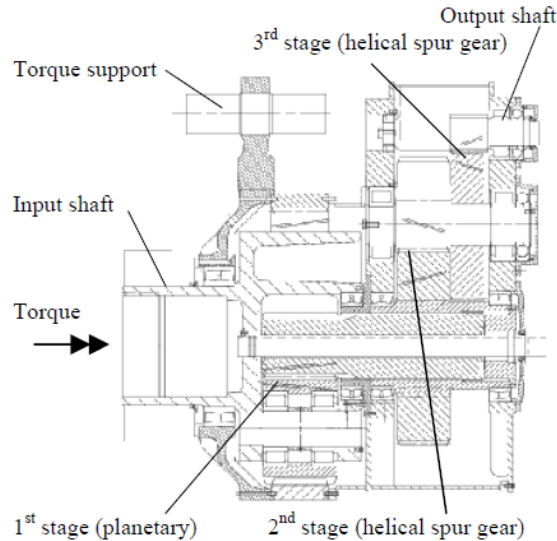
Structure of a typical 1 planetary stage, 2 helical stage wind turbine gearbox. Germanischer Lloyd WindEnergie GmbH
